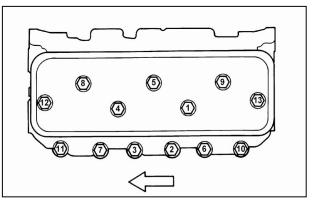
Cylinder Head Bolt Tightening Sequence
